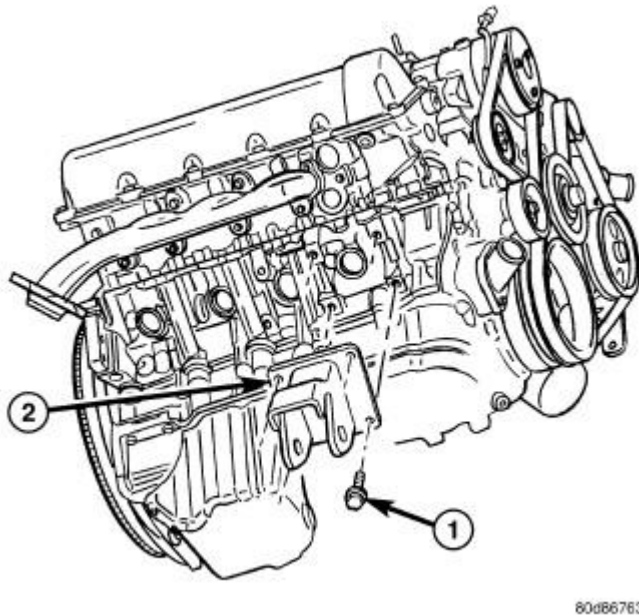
ENGINE MOUNT SUPPORT BRACKET RH
